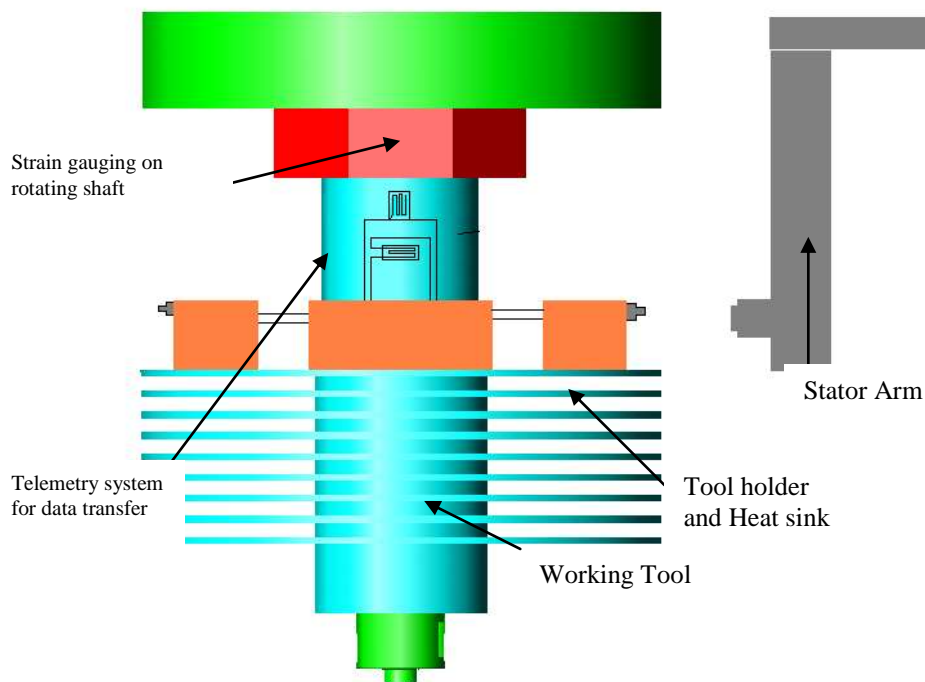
Improved concept model for measuring weld parameters
